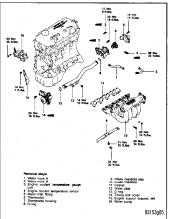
Exploded view of the intake manifold mounting—1993 1.8L engine
